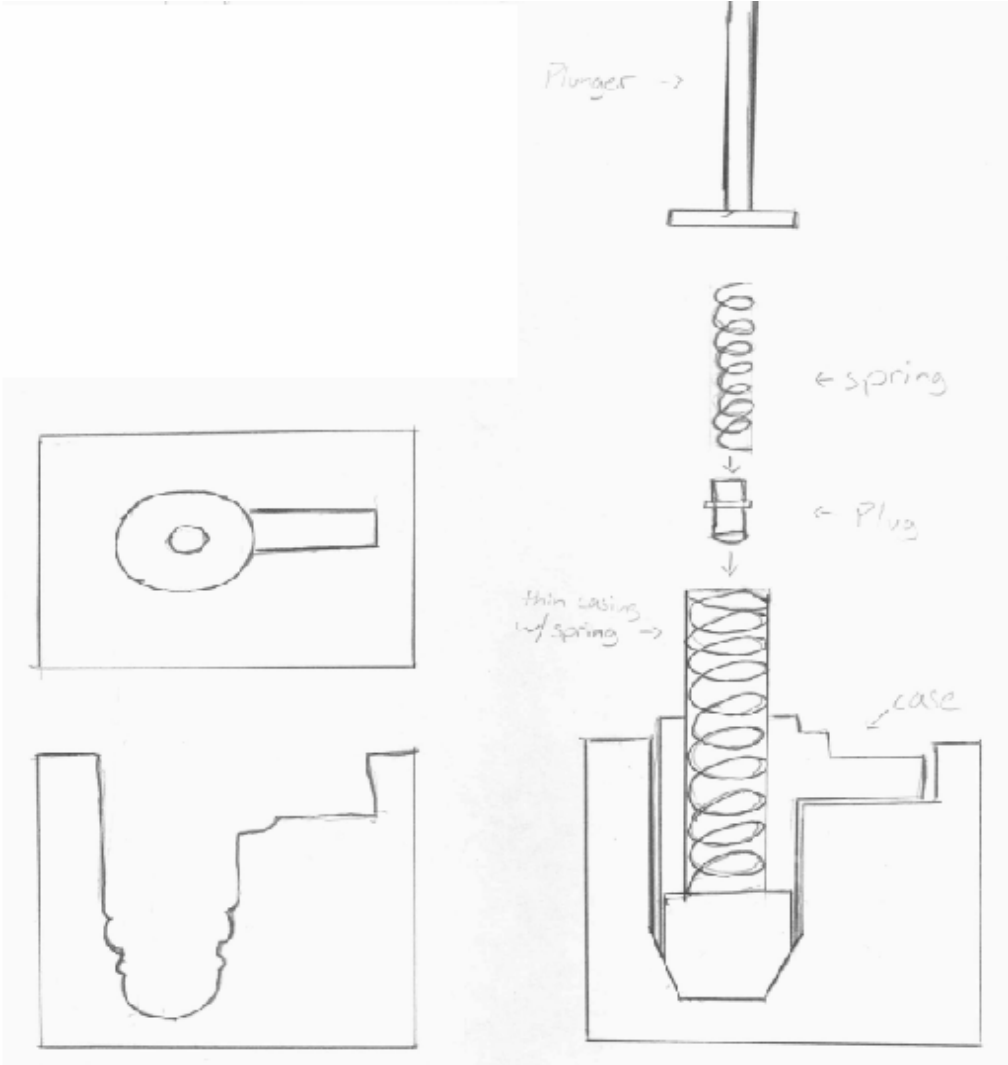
Design 3, Concept of a Three-Step Plunger Jig
